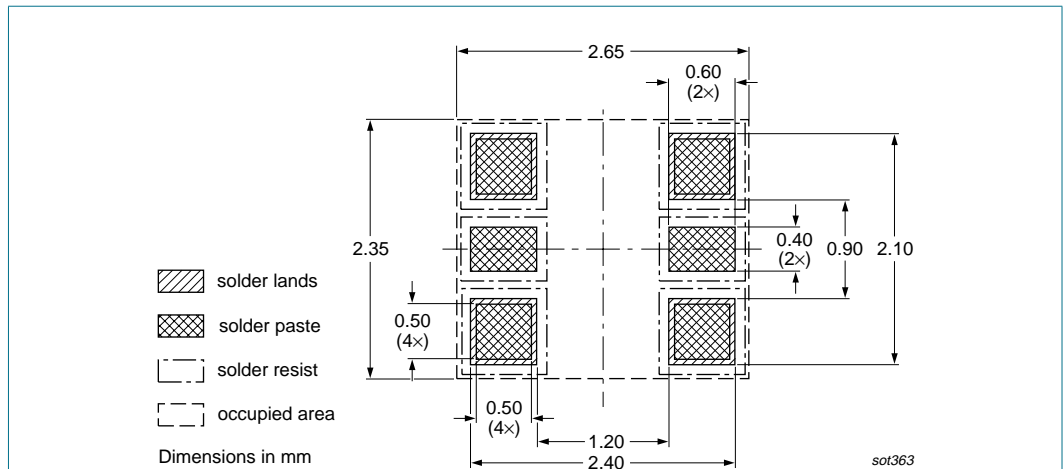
Reflow soldering footprint BAV756S and BAW56S (SOT363/SC-88)
